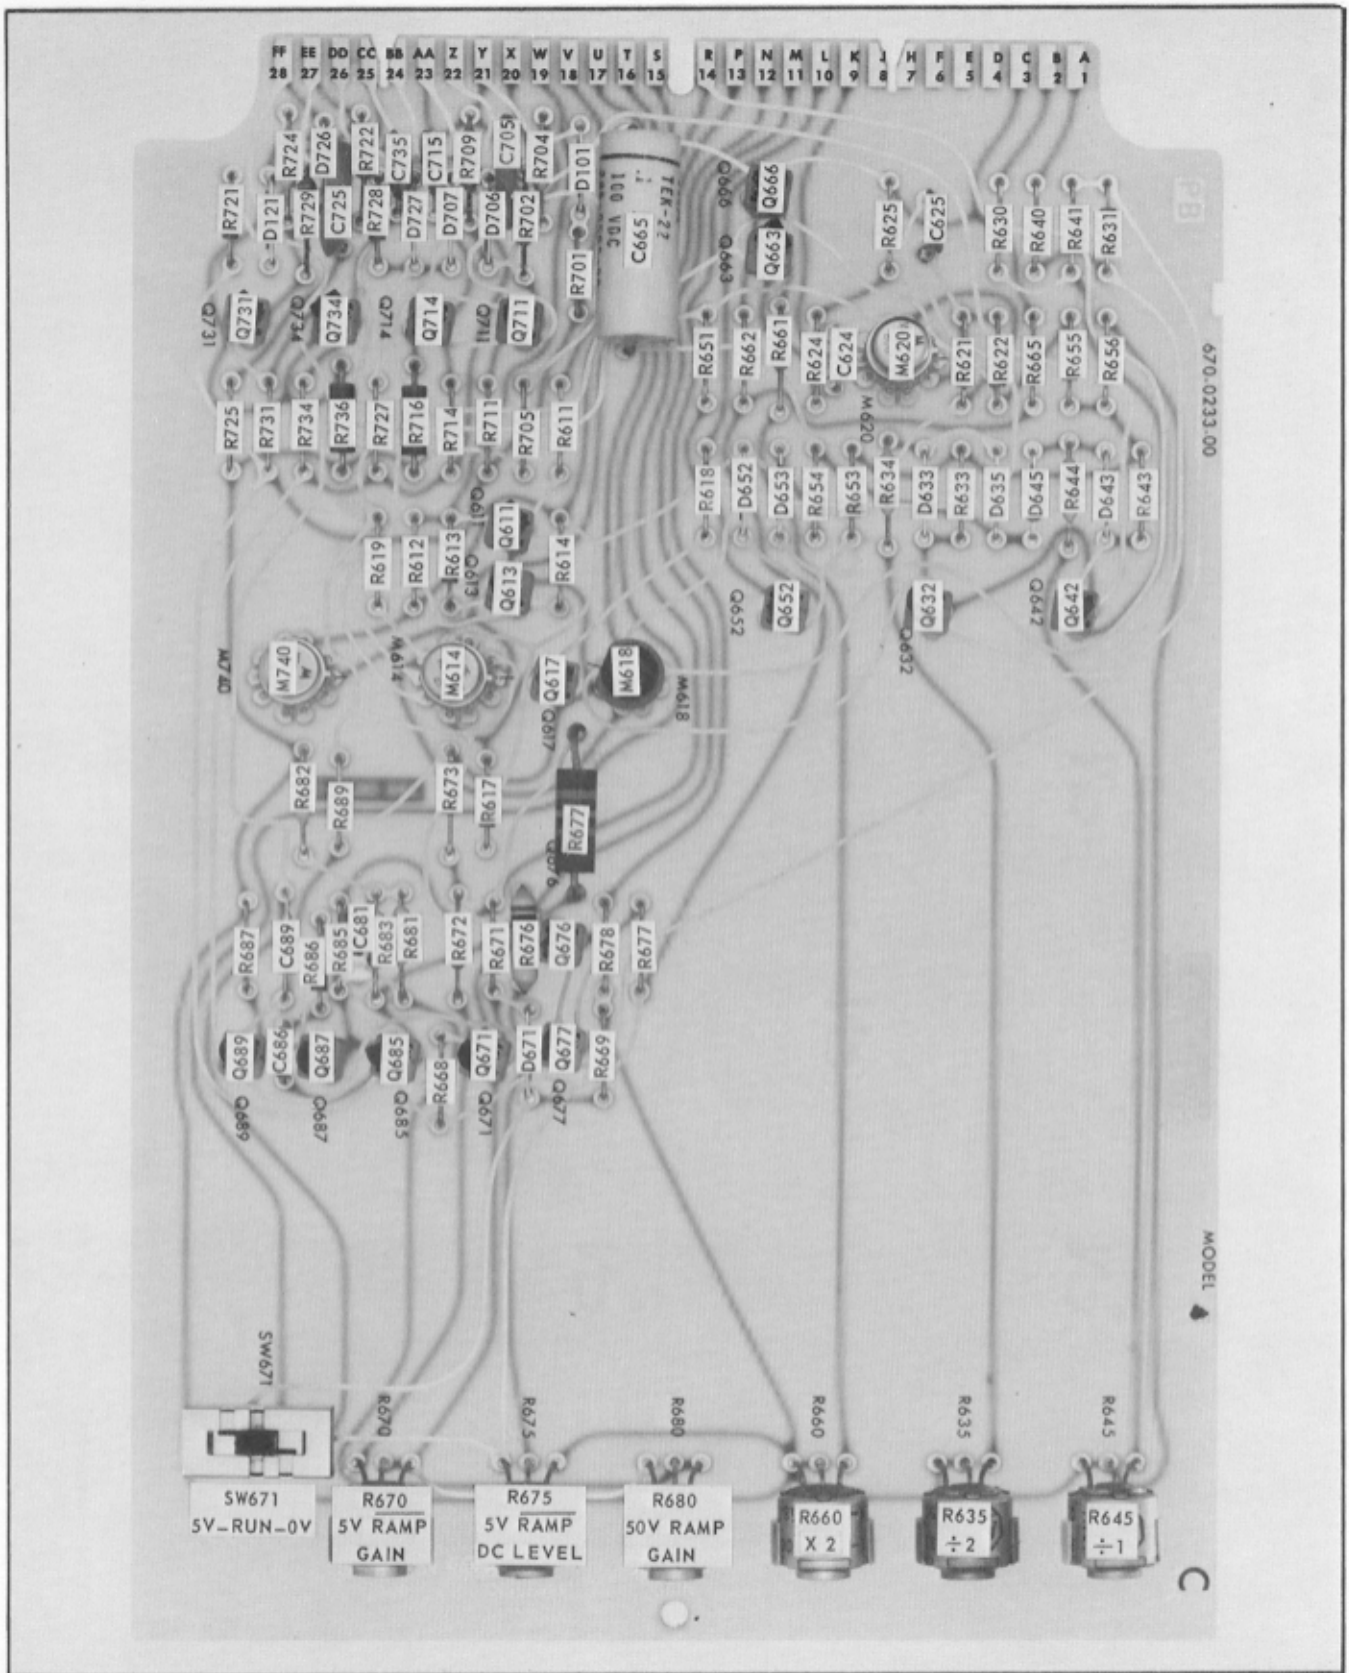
Component locations on the Buffer card (Model 4-up).
